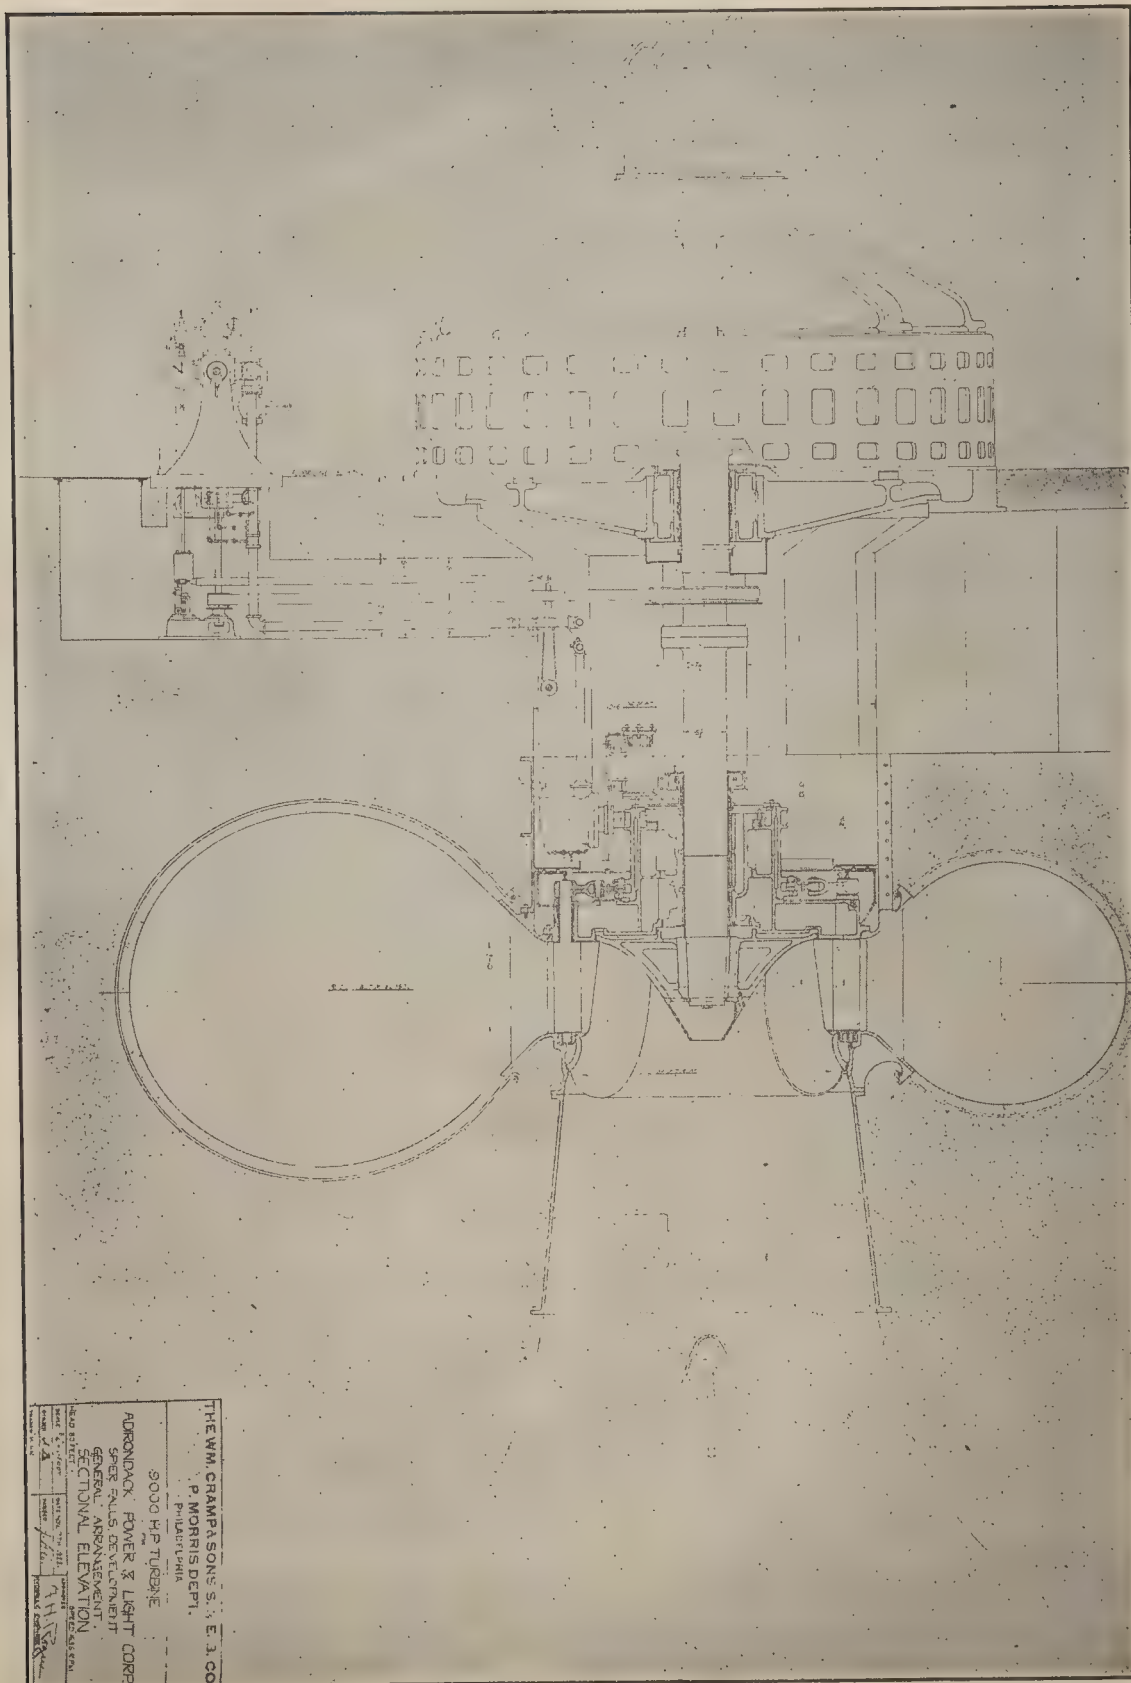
SKETCH SHOWING GENERAL ARRANGEMENT OF 9000-HP. TURBINE FOR SPIER FALLS DEVELOPMENT, ADIRONDACK POWER & LIGHT CORPORATION.
